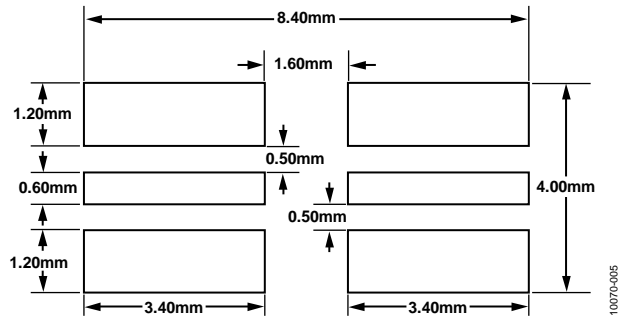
Optimum Footprint Dimensions (Based on Welwyn ULR Green Resistor and Layout in Figure 8)
